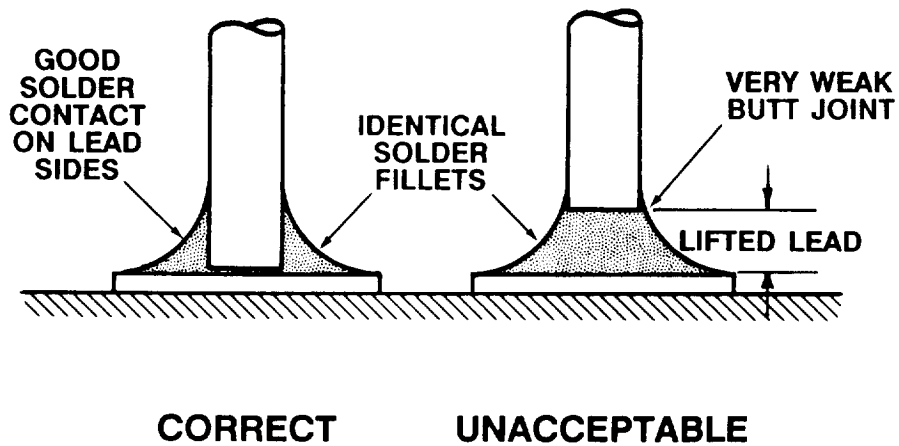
Problem of poor inspectability of solder fillet on stub-mounted lead
